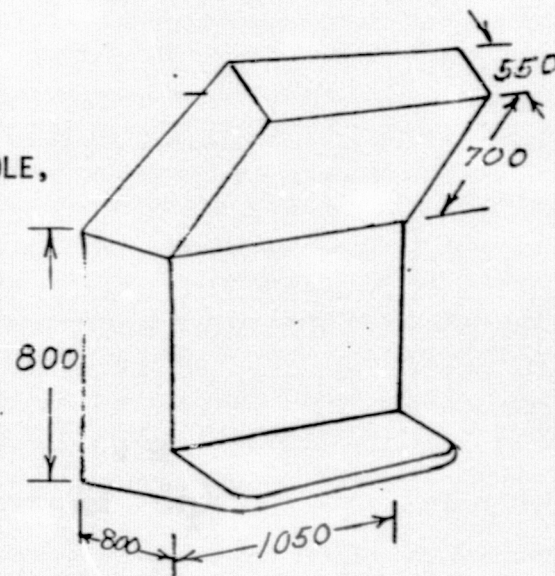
Assembly Level Data Sheet — SCB Control Station
